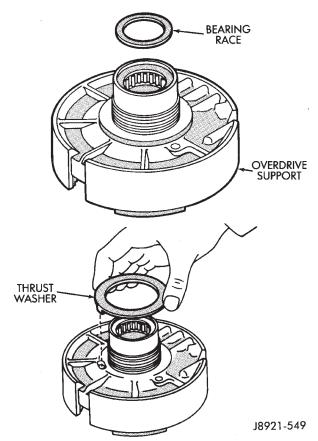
Removing Clutch Drum Thrust Washer And Race
